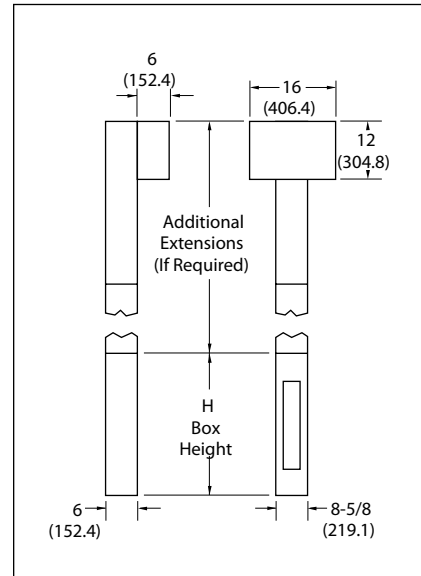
PRL1a-LX Trough Extension, Dimensions in Inches(mm)
